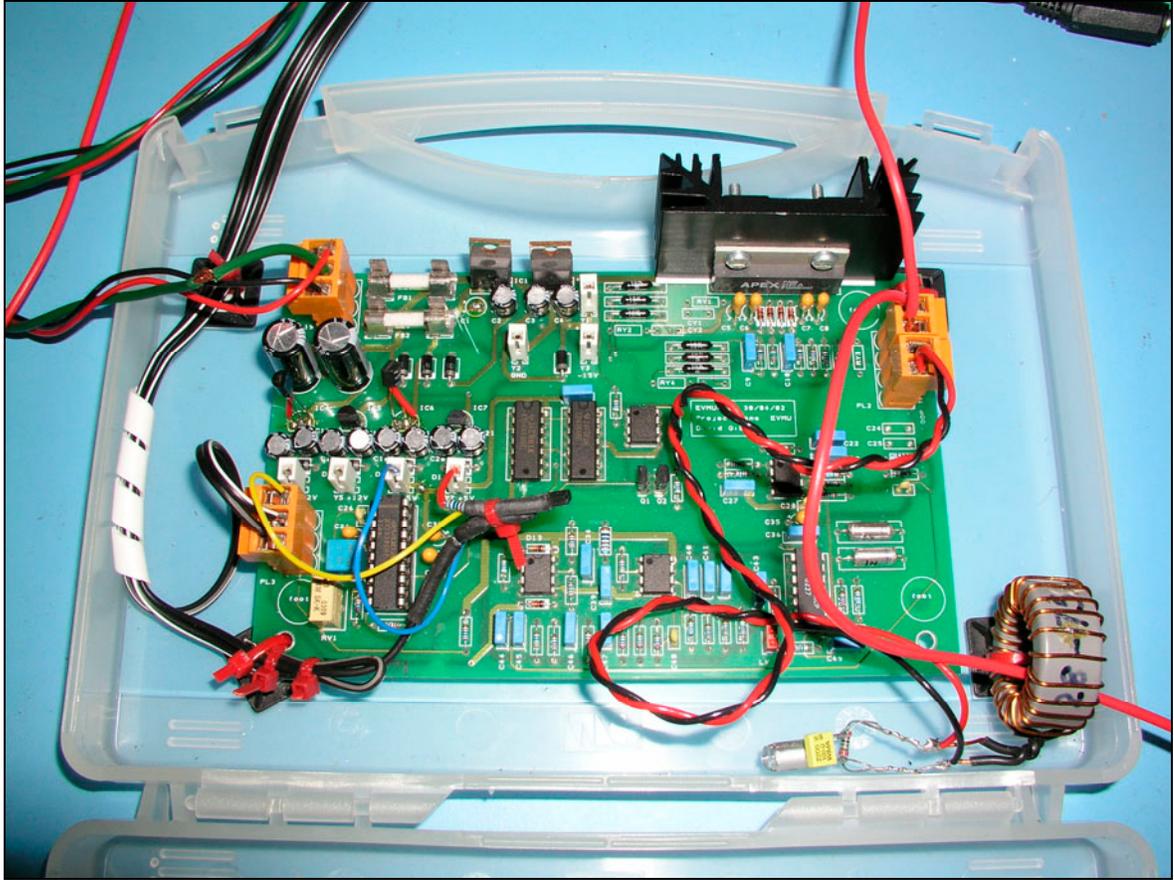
Photograph of Control Unit PCB. This is the 'lab' prototype.
